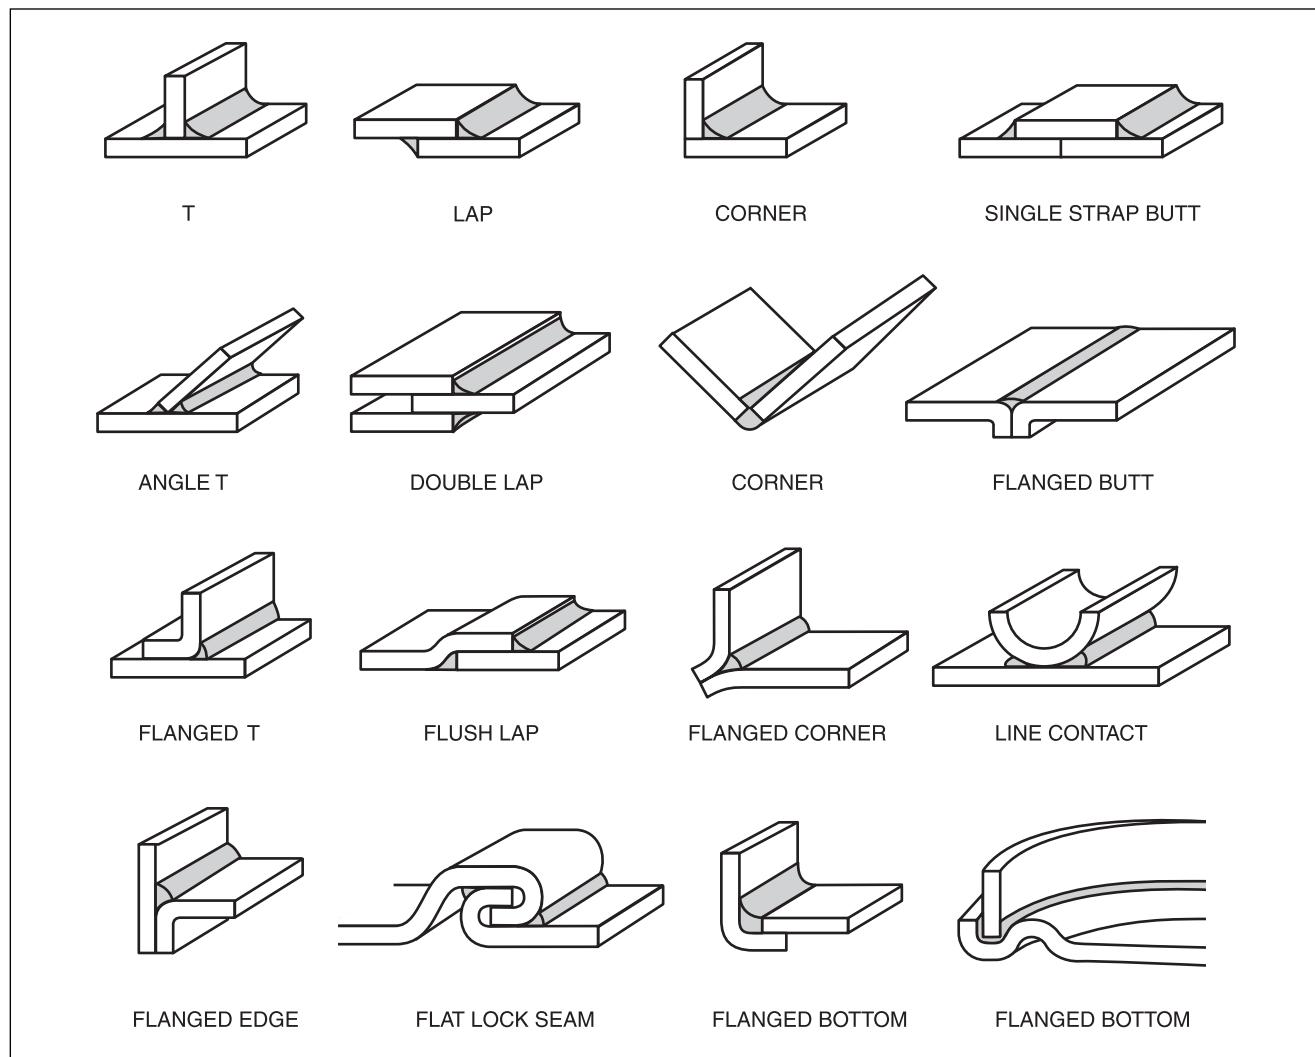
Typical Self-Fixturing Methods for Braze Assemblies
